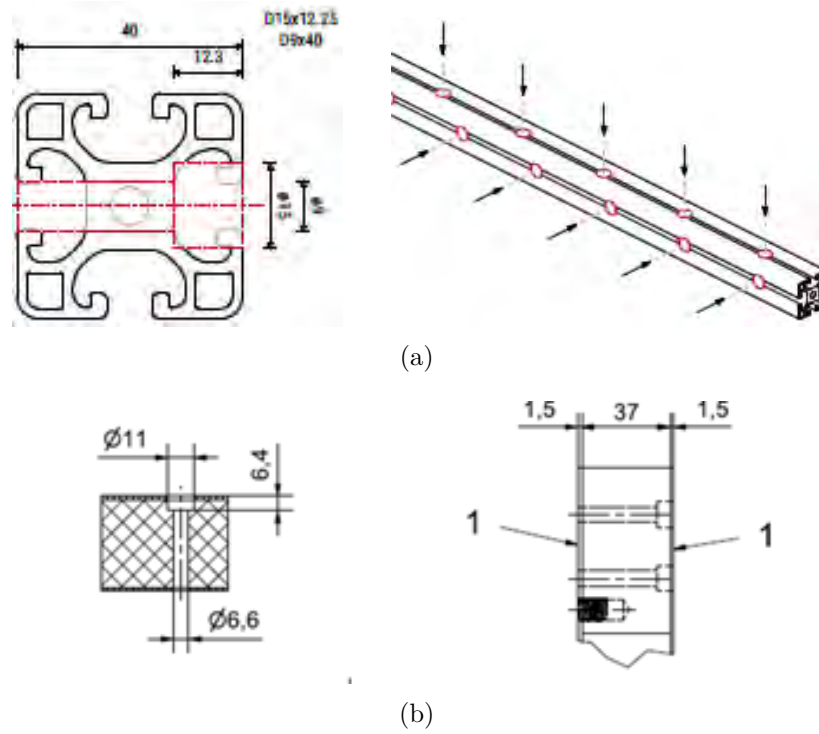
(a) Drawing of the mechanical adjustment on the aluminium item[®] frame for mounting the eventual mainframe and carbon box. (b) Drawing section of the screw holes and threaded sets in the carbon plates for mounting and other connections (figures from J. Thaufelder (GSI, Darmstadt)).
